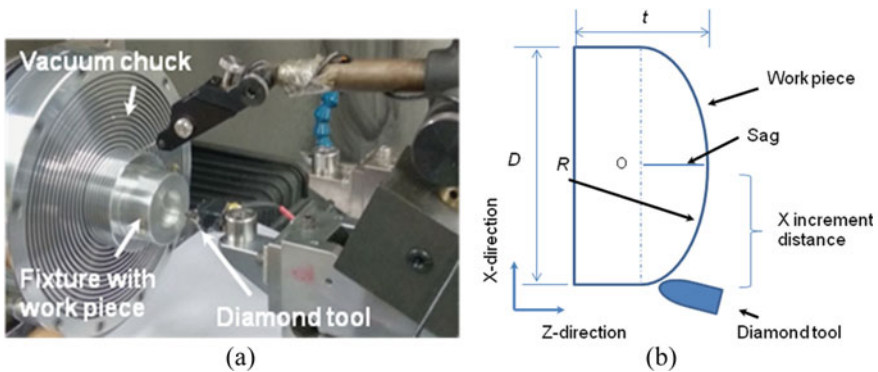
Diamond turn machining a experimental setup and b spherical cutting
